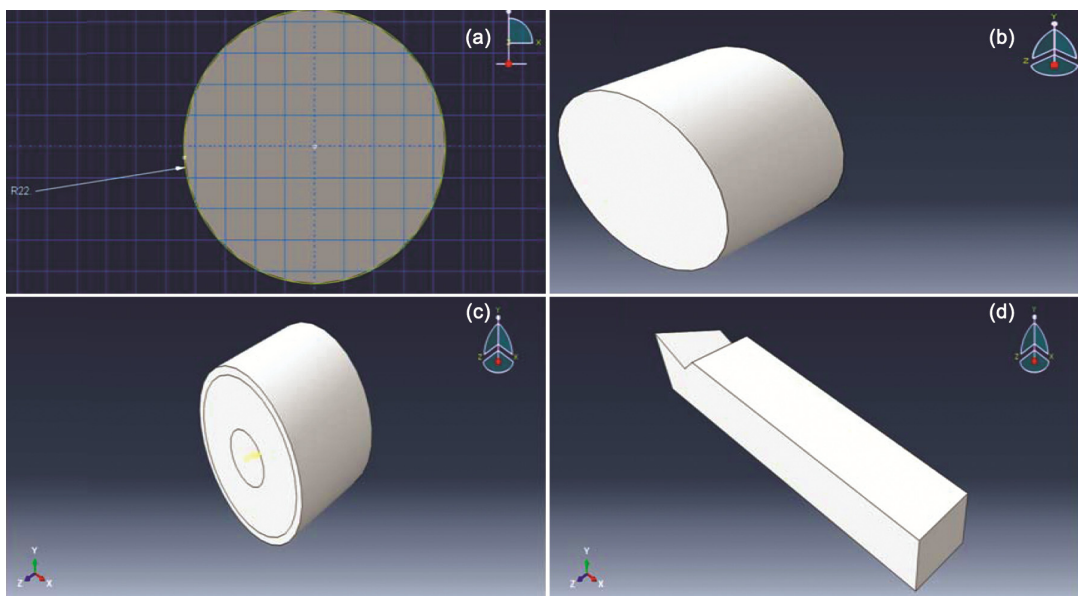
(a) Geometry of workpiece R22 mm, (b) Extruded cylinder workpiece 30 mm, (c) Partitioned regions in the work piece and (d) Single point-cutting tool.
